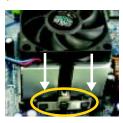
&6 Alignment of Heatsink Assembly with Standoffs
